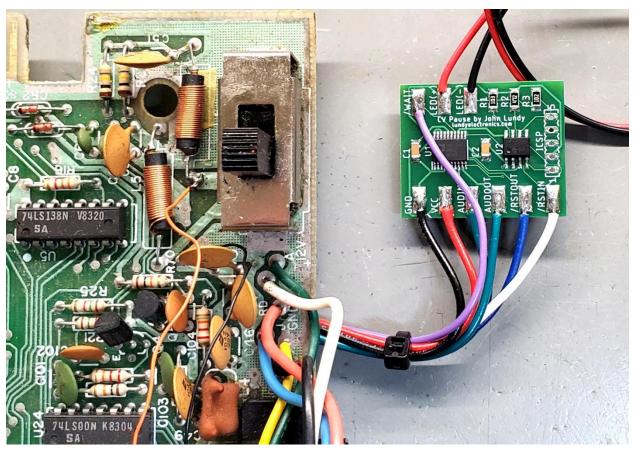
Cleanly trip, strip, and solder wires to the Pause Mod PCB
